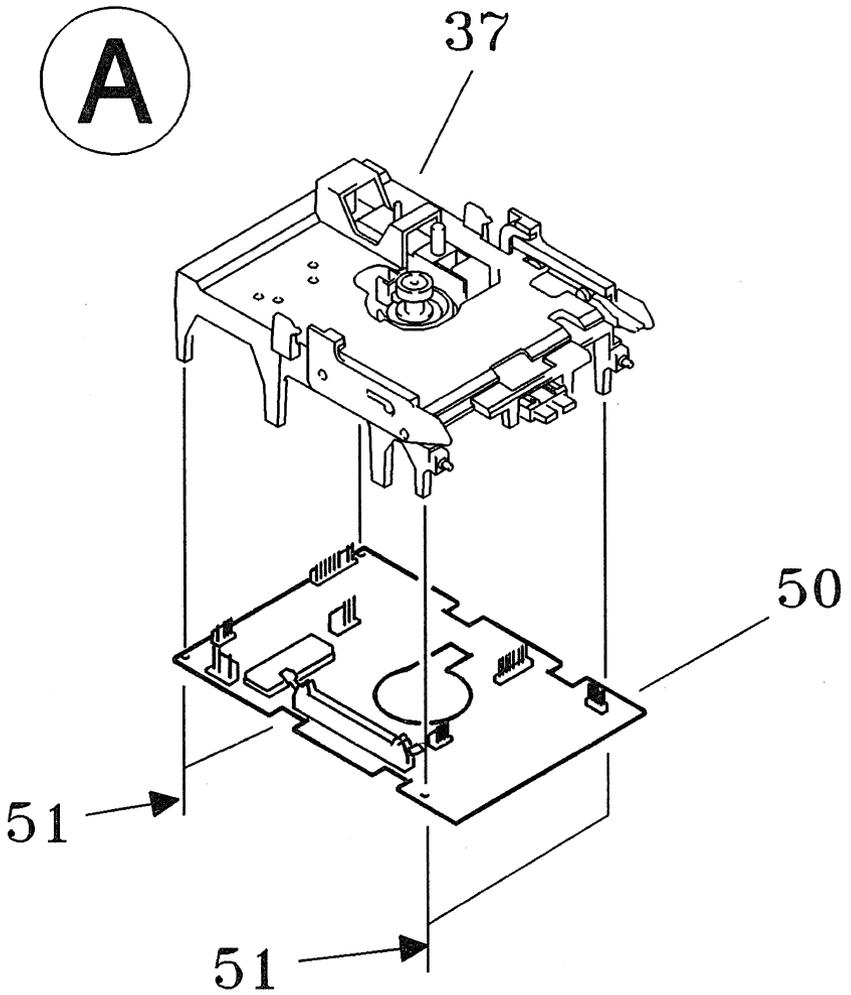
HP 35401 Exploded View (sheet 2 of 3)
